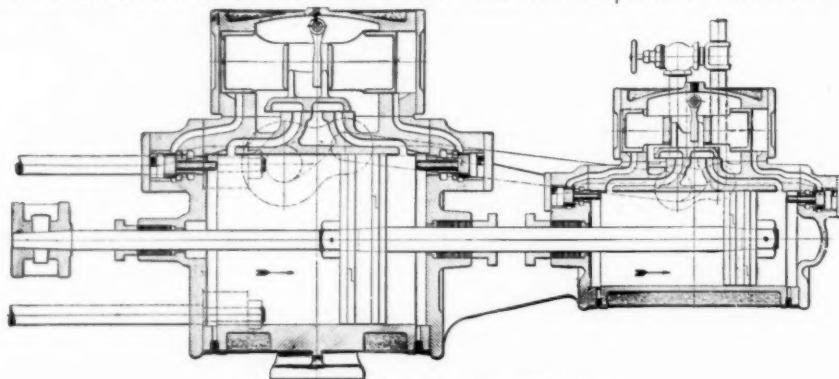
SECTIONAL VIEW OF MINE PUMP.
